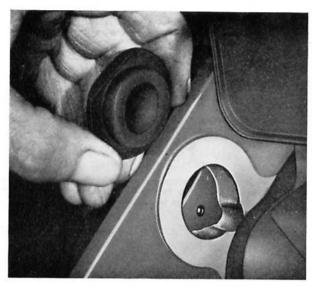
The timing aperture plug removed showing steel timing ball in line with the aperture notch
